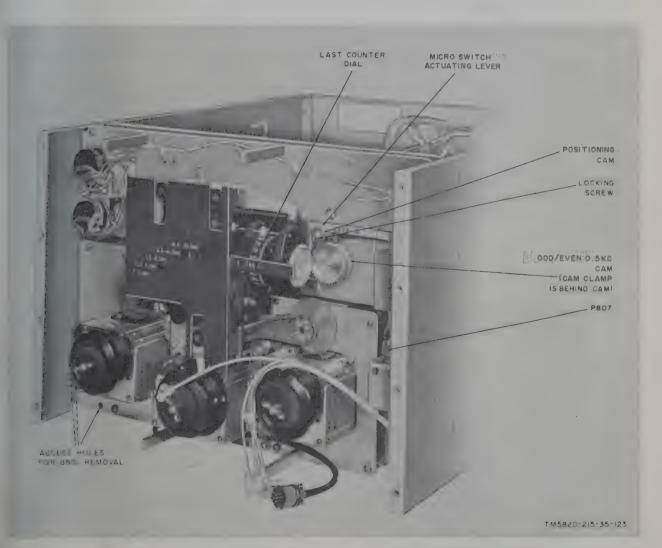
Exciter-monitor, front panel removed, 0.5-kc switch components.
